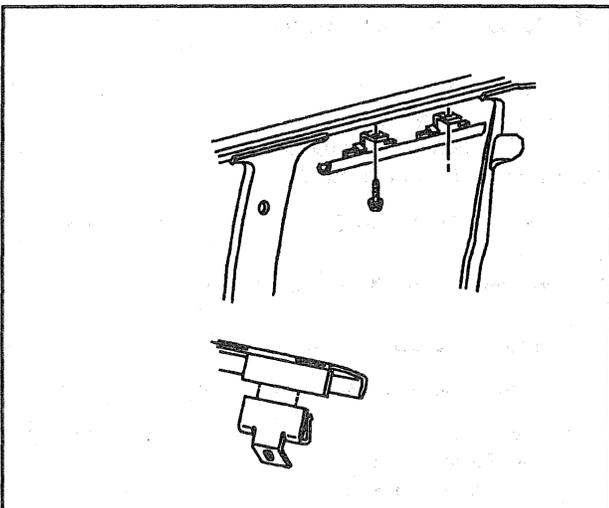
Rear Side Door Upper Garnish Molding Replacement
